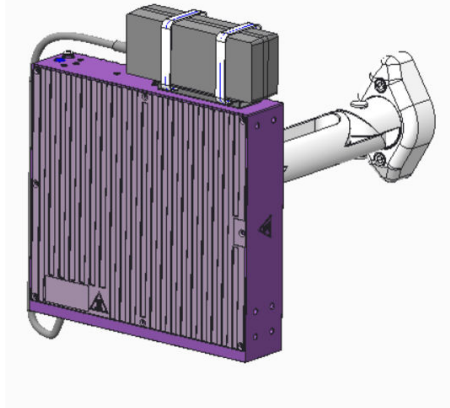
V300-8P/8T-2X VESA Mounting with PSU
